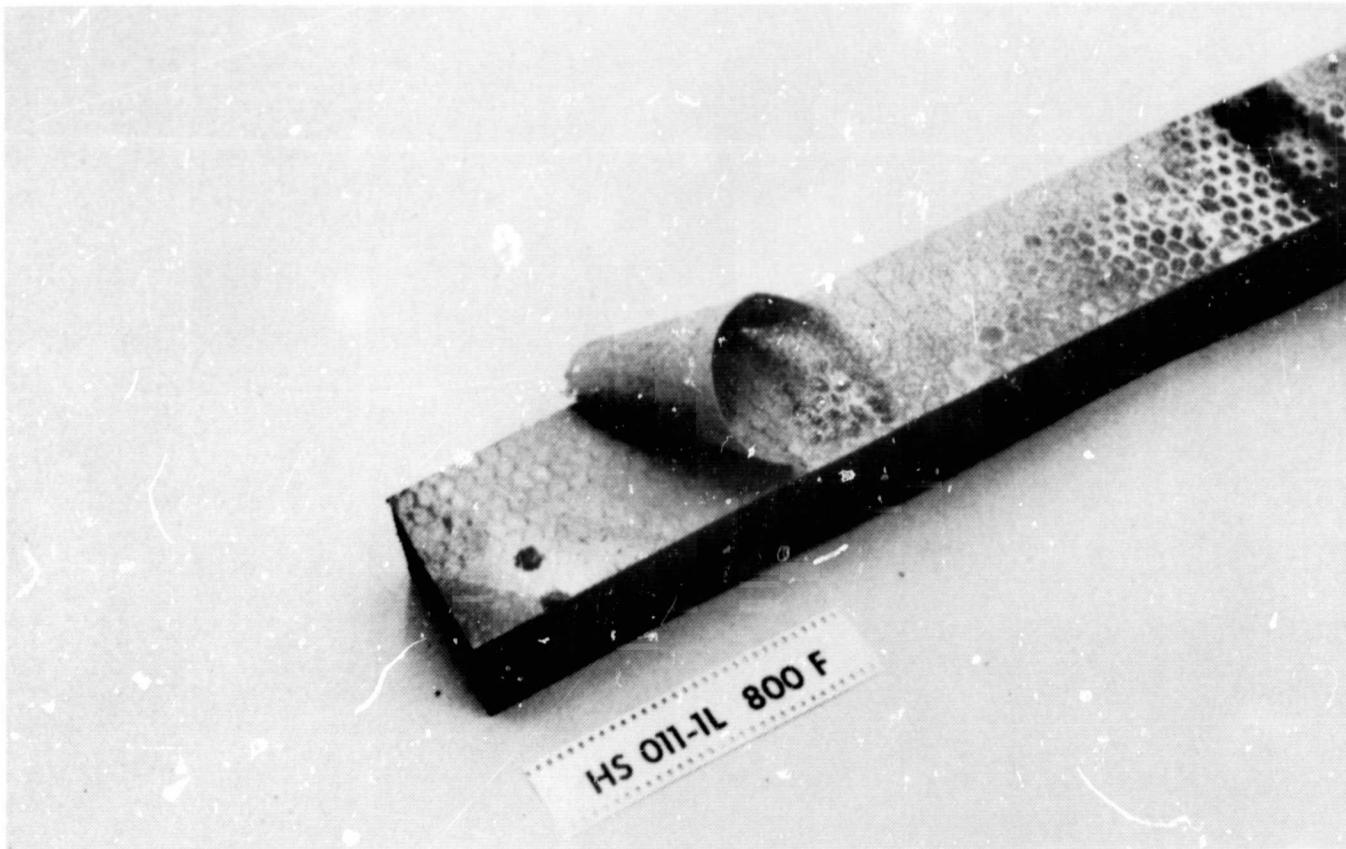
Epoxy adhesive film residue on apollo heat shield specimen after testing at 800° F.
